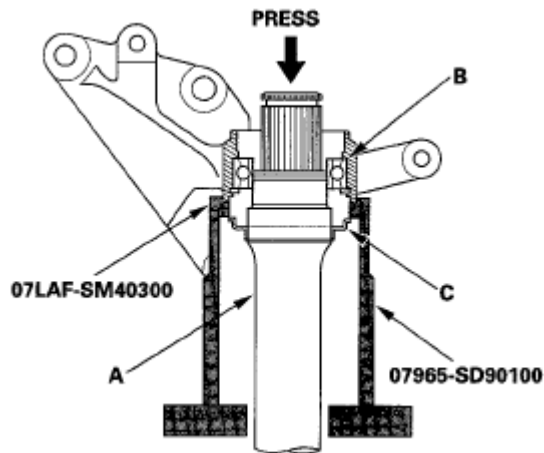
Pressing Intermediate Shaft Of Intermediate Shaft Bearing
